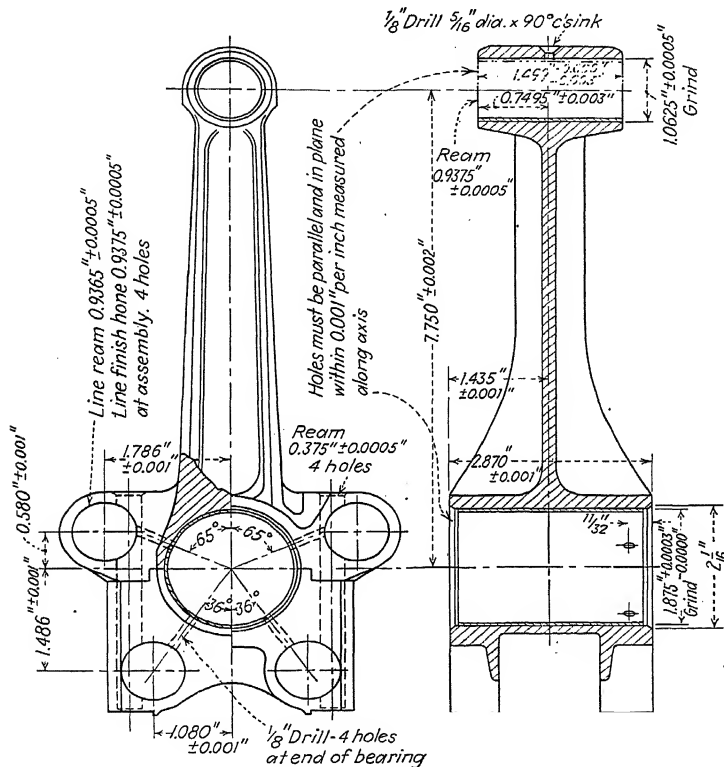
LeBlond five-cylinder radial-engine two-piece master-connecting-rod assembly.
